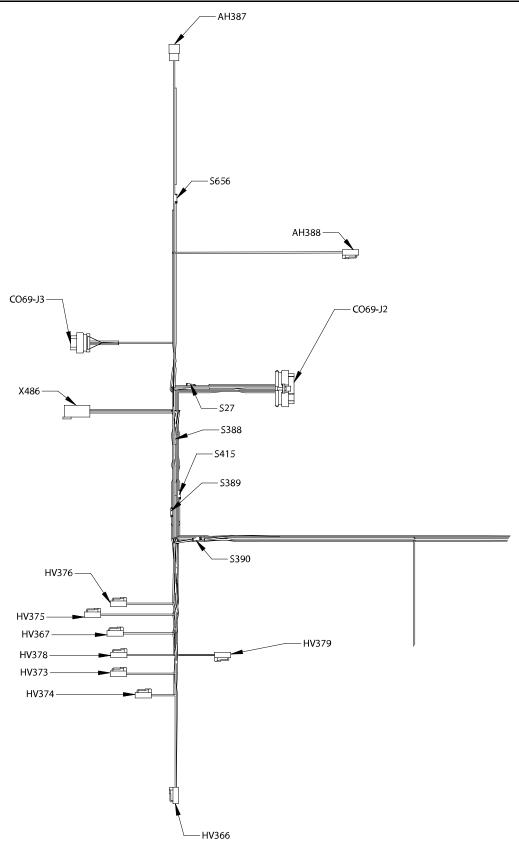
Chassis Solenoid Harness - Sheet 3 of 3
